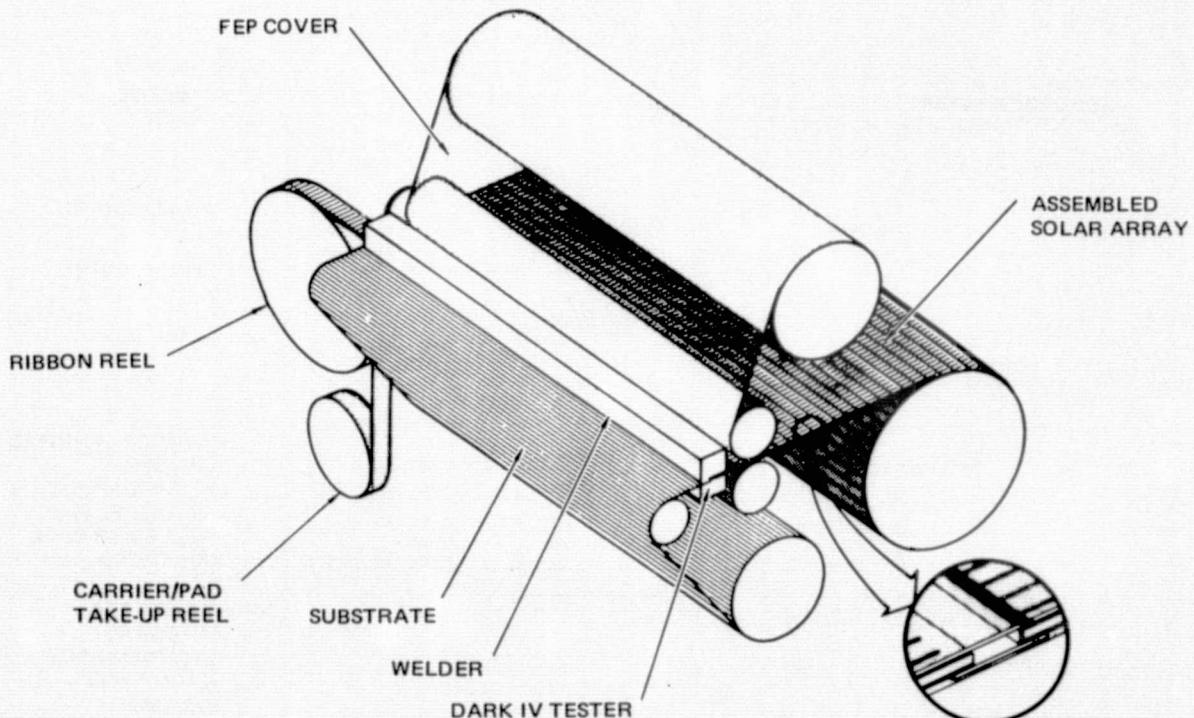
Assembly of Silicon-Ribbon Solar Cell Blanket
